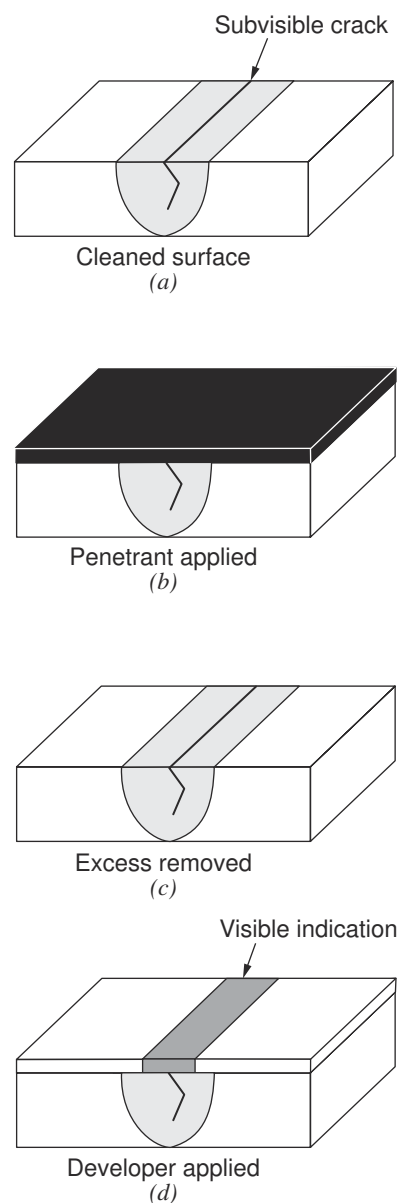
Penetrant testing: (a) cleaning; (b) penetrant application; (c) removal of excess penetrant; (d) application of developer.
